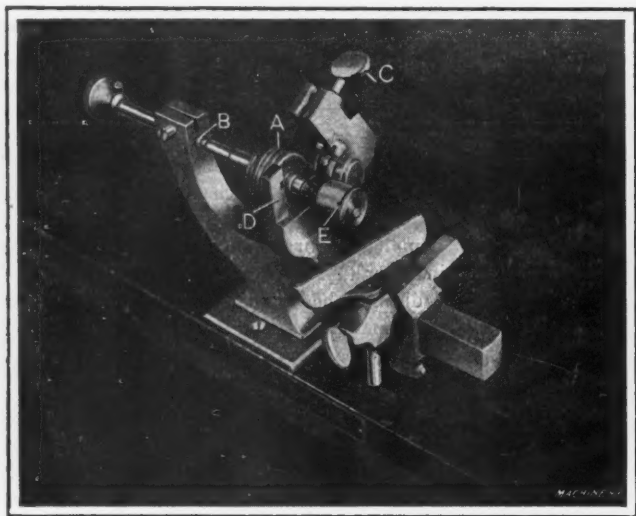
Special Type of Lathe used for refinishing an Unmounted Diamond Wire-drawing Die
